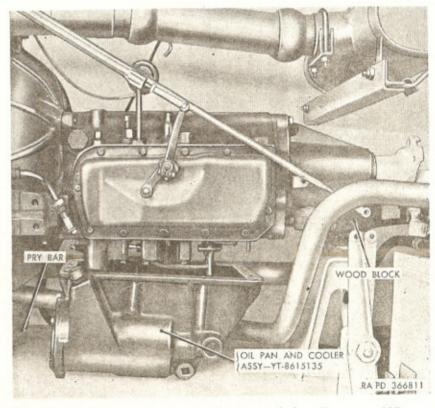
Removing or installing transmission oil pan—301MG (left unit shown).
